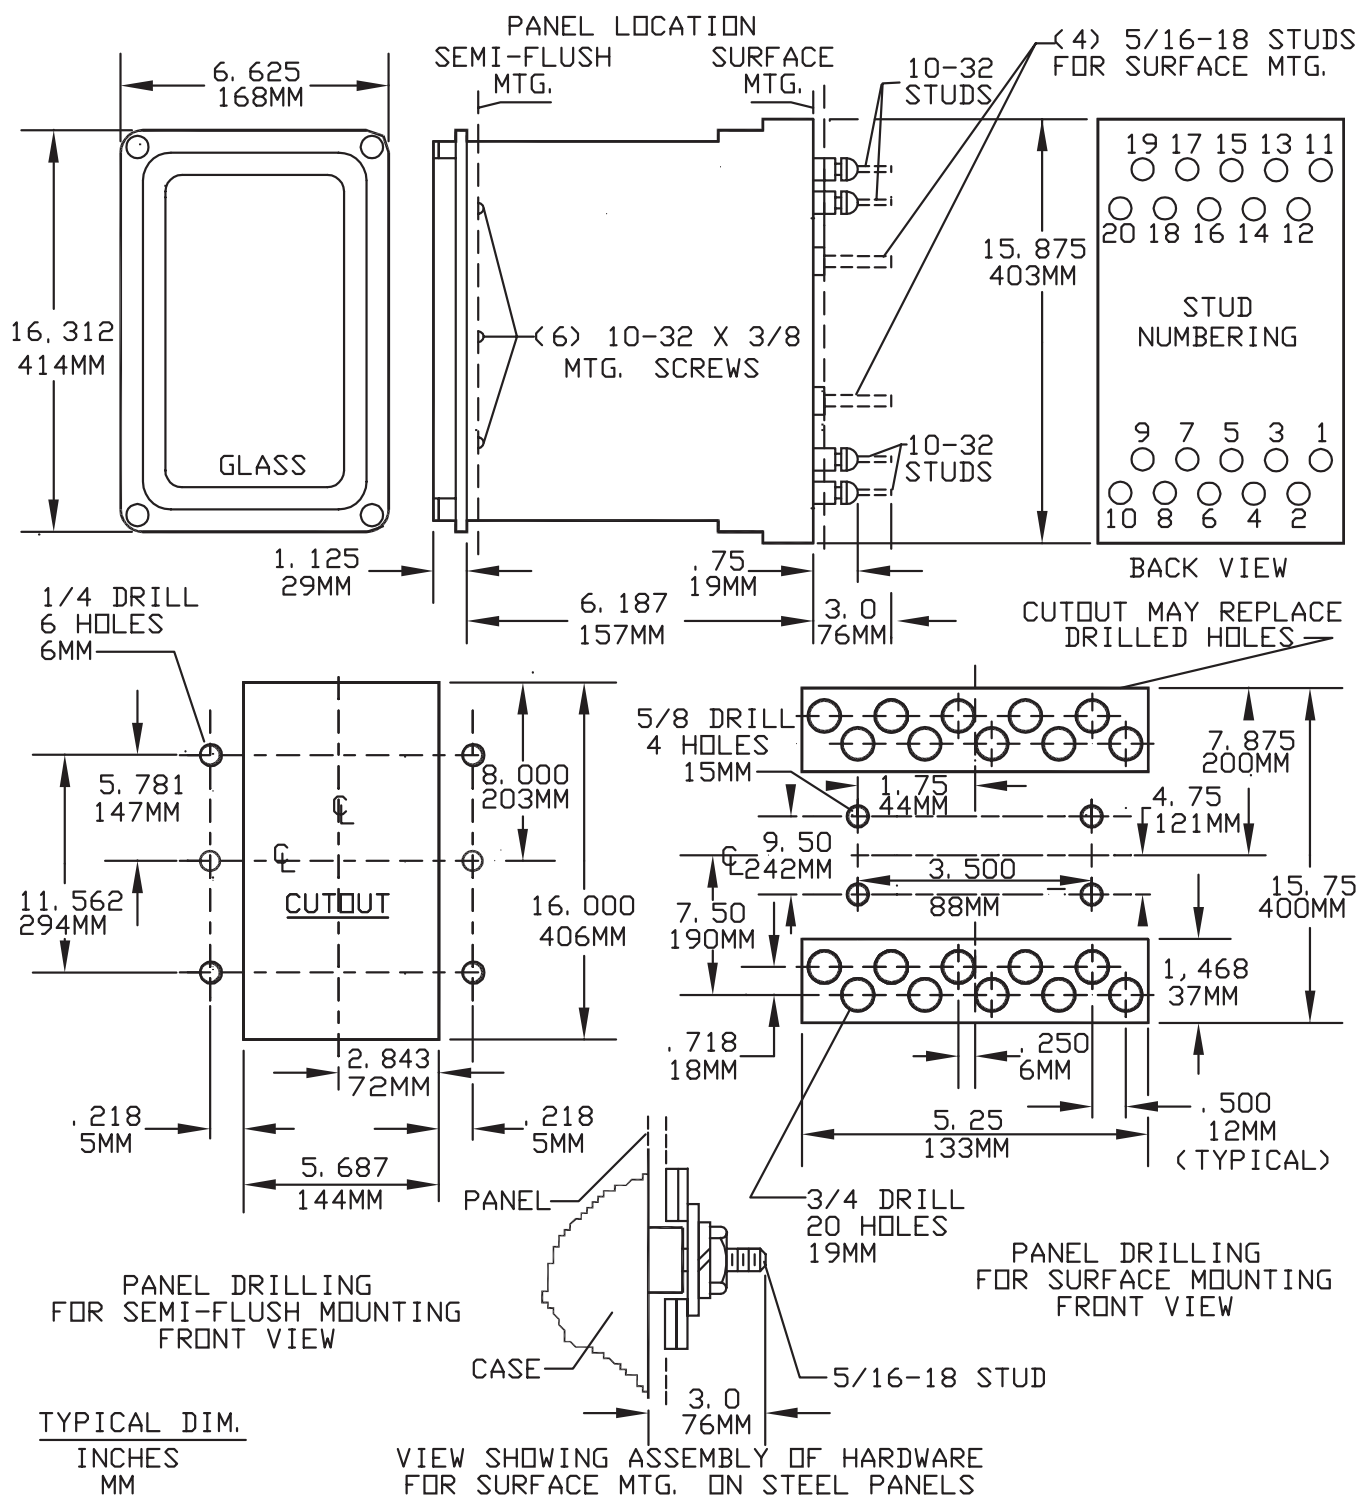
(K-6209274-6): OUTLINE AND PANEL DRILLING DIMENSIONS
